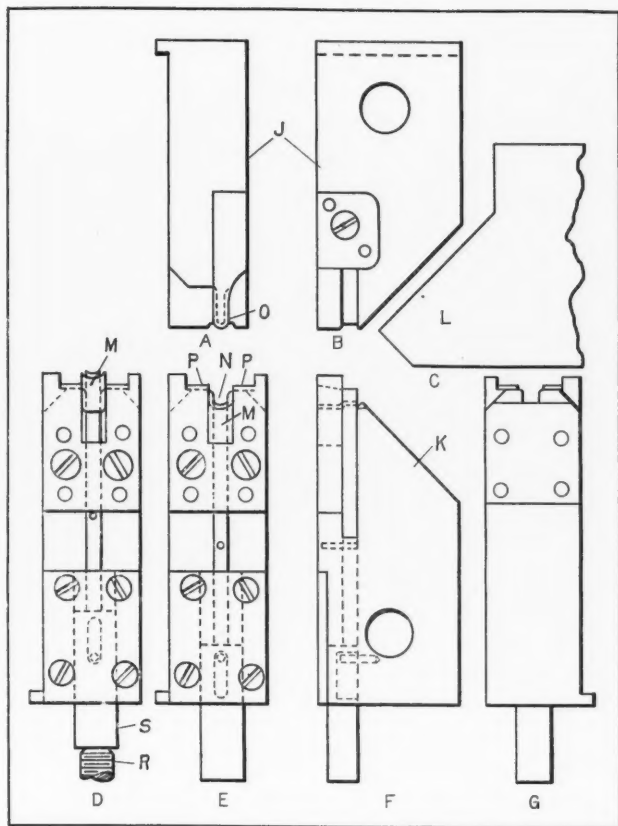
Details of Punches J, K, and L, Figs. 3 and 5, Which Cut Off and Form Part W
